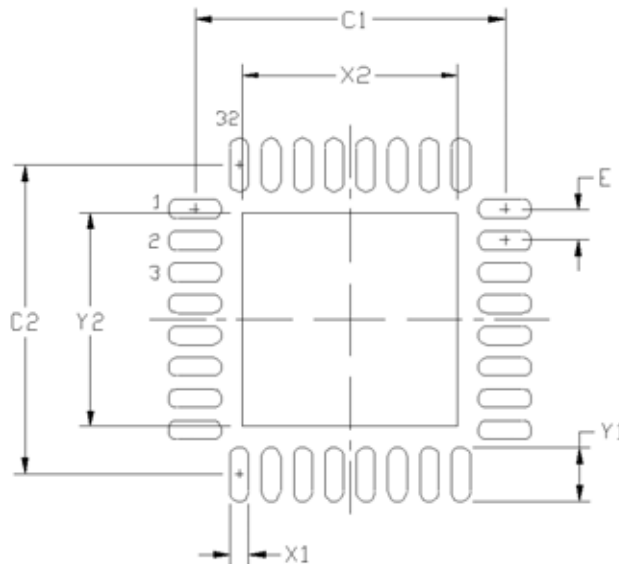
QFN-32 Recommended PCB Land Pattern
